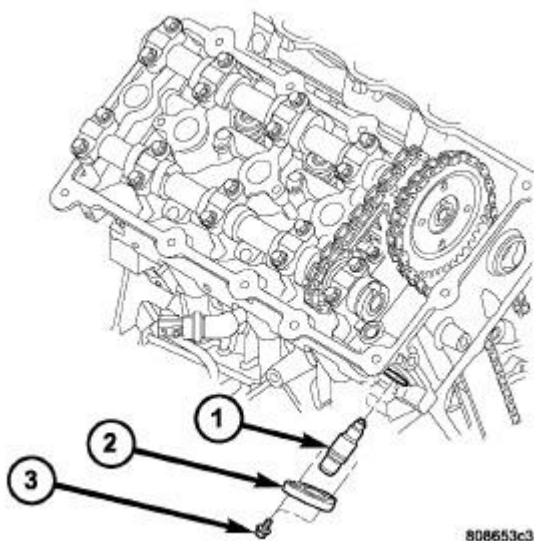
PRIMARY TIMING CHAIN TENSIONER
